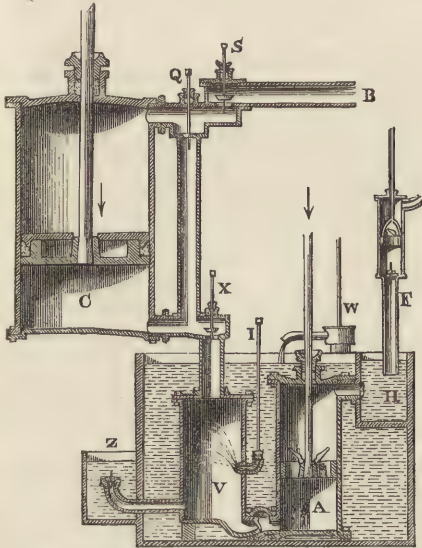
STEAM WORKING PARTS OF WATT'S SINGLE-ACTING ENGINE.
